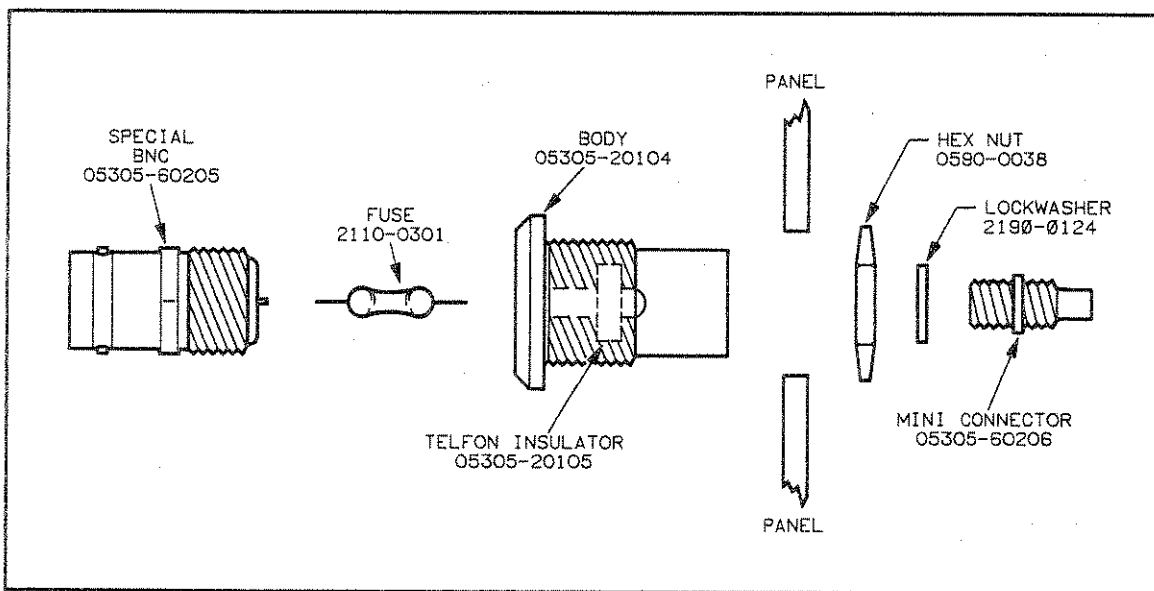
Details of INPUT C BNC Connector and Fuse Mounting (5334A Only)
